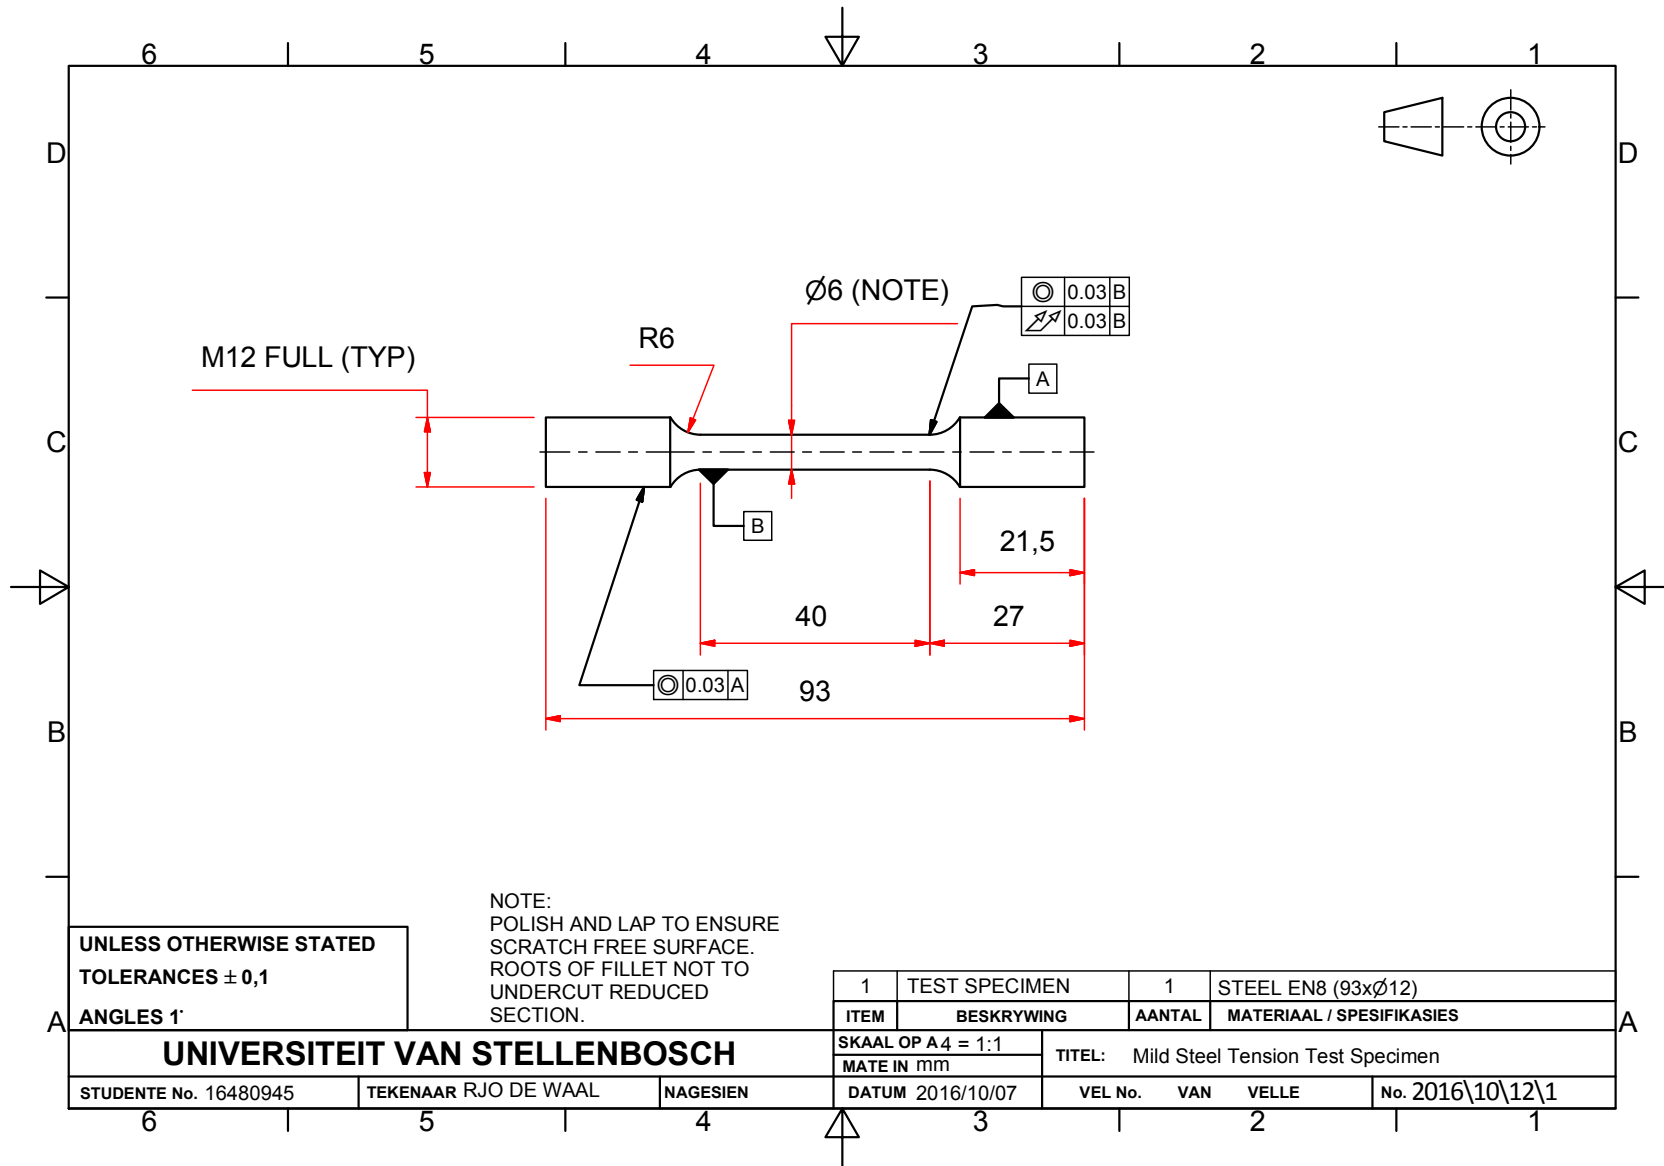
Drawing of the machined specimen from the shaft on which data validation tests were performed.
